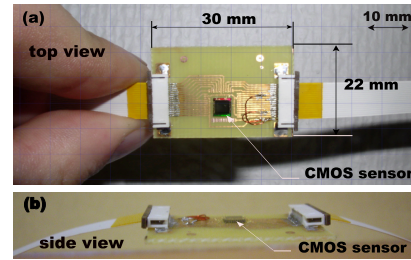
Photography showing the final connection of the developed CMOS camera and integrated in the PCB support.
